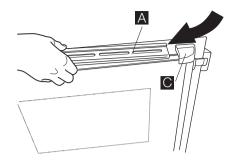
Pull the perforated aluminium plate "A" out of the retainer "C".
